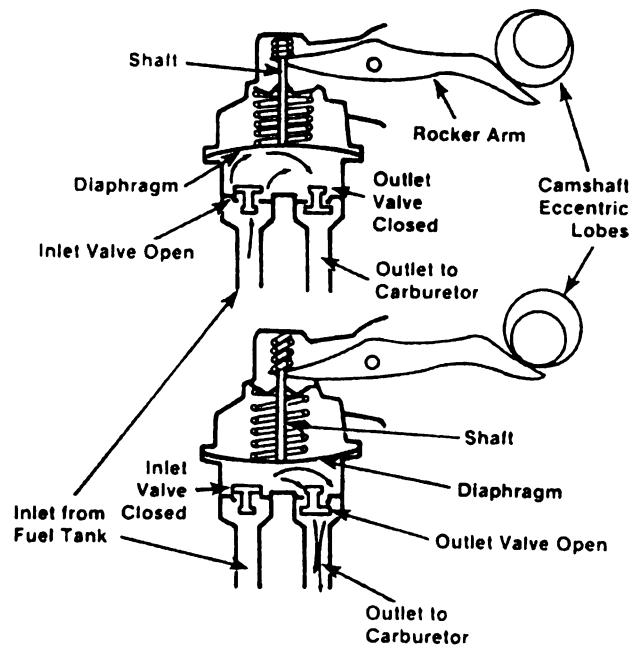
Mechanical fuel pump assembly (after Robert Scharff, 1989)
